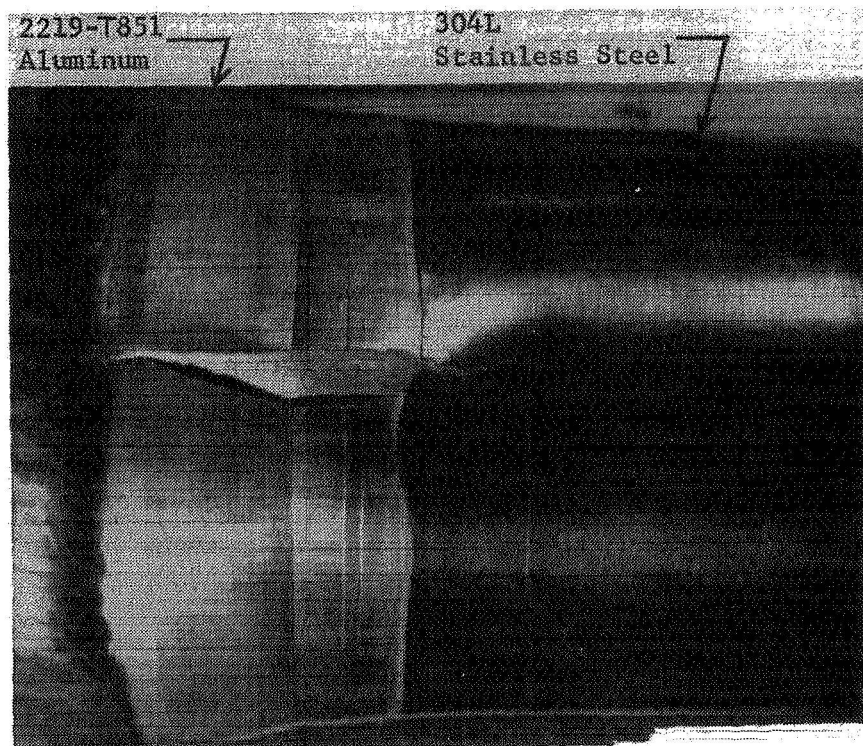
Hoop Mode Failure of Explosive Welded Joint
